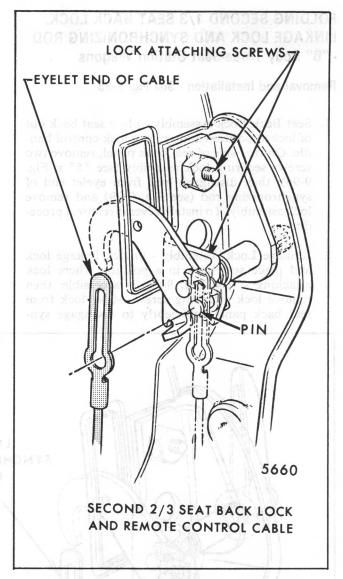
Second 2/3 Seat Back Lock Assembly and Remote Control Cable - "B" Body Three-Seat Station Wagons
